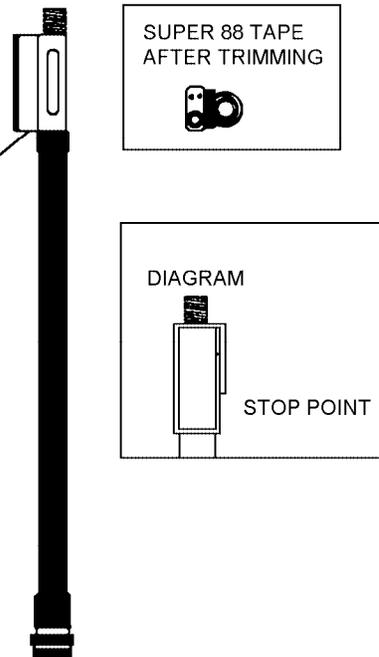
Modified Regulator to Seat Kit Hose Assembly Taping
